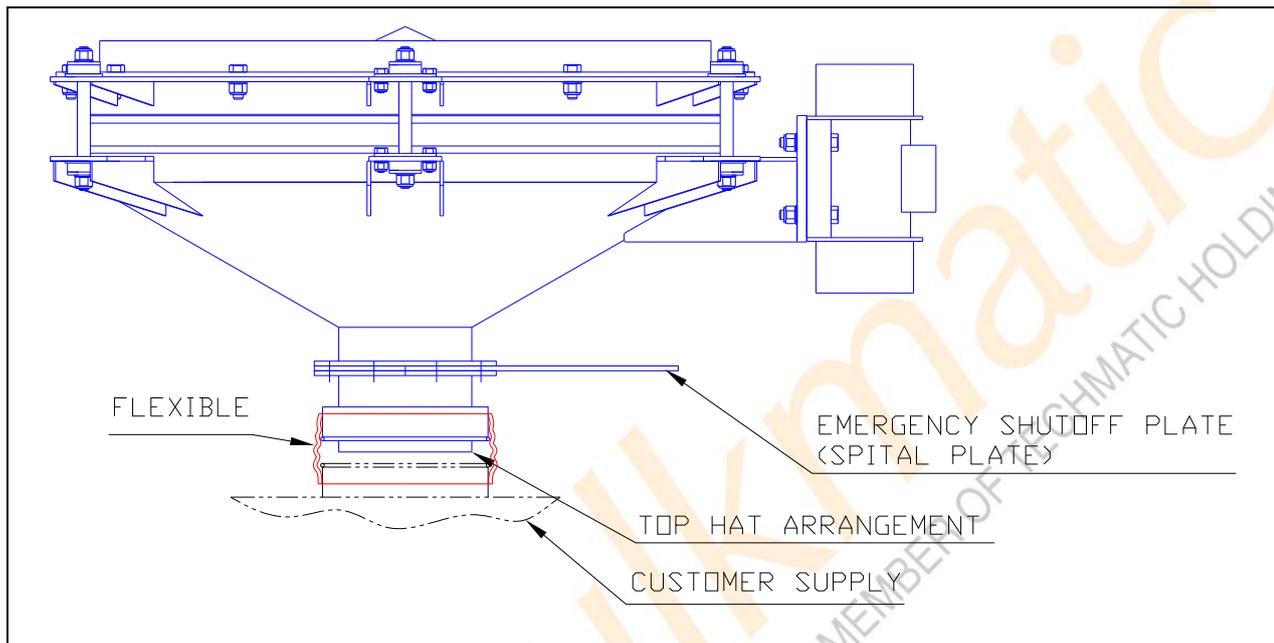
Ideal outlet connection arrangement – ordering option SPSSR
